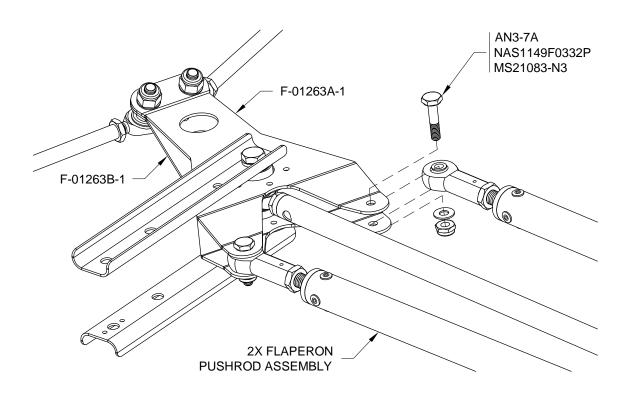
ATTACHING THE FLAPERON PUSHROD ASSEMBLIES
